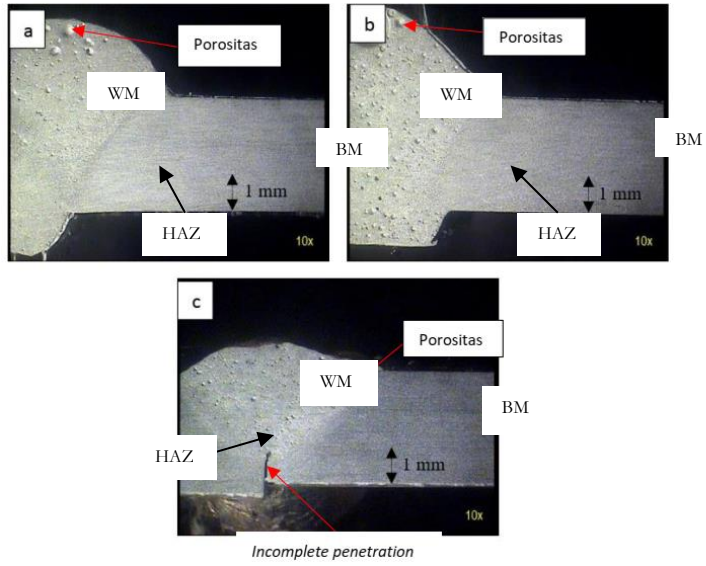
Sectional macrostructure at welding speeds: (a) 10 mm/s, (b) 13 mm/s, and (c) 16 mm/s
